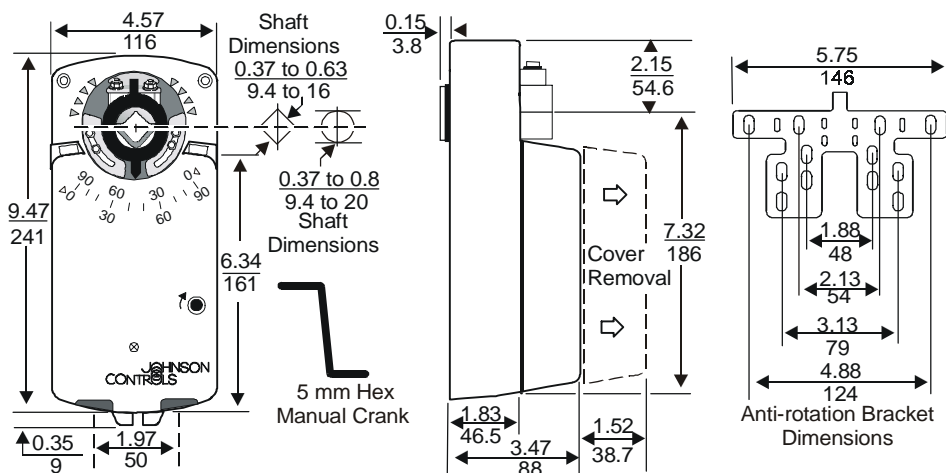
Actuator, Anti-rotation Bracket, and Manual Crank Dimensions, in. (mm)
